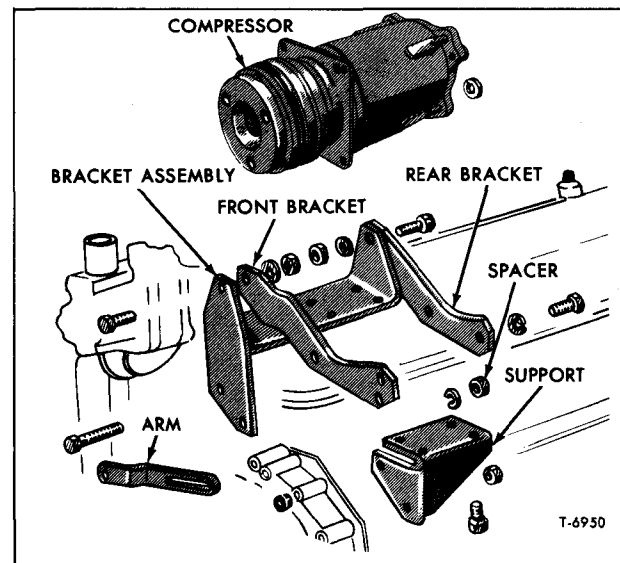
Compressor Mounting (6-71 Conv. Cab Model)
